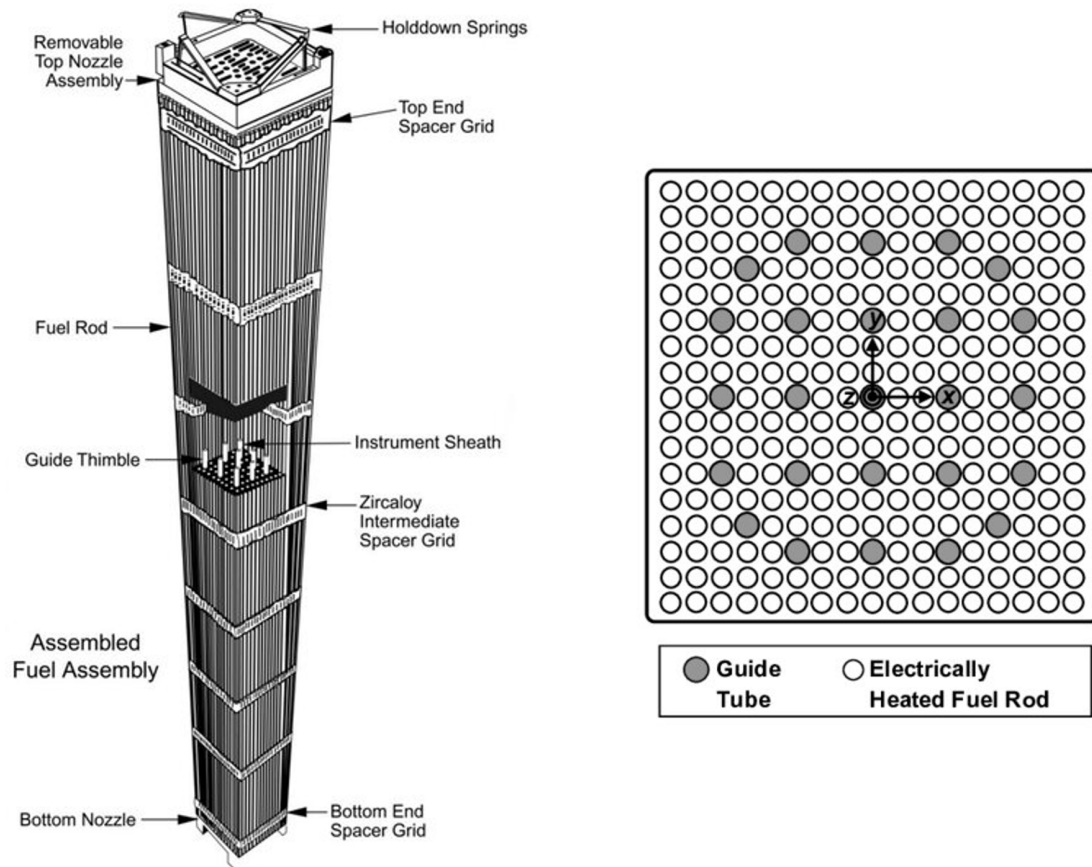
Sketch of a nuclear fuel assembly. Adapted from [Kenich \(2019\)](#).
